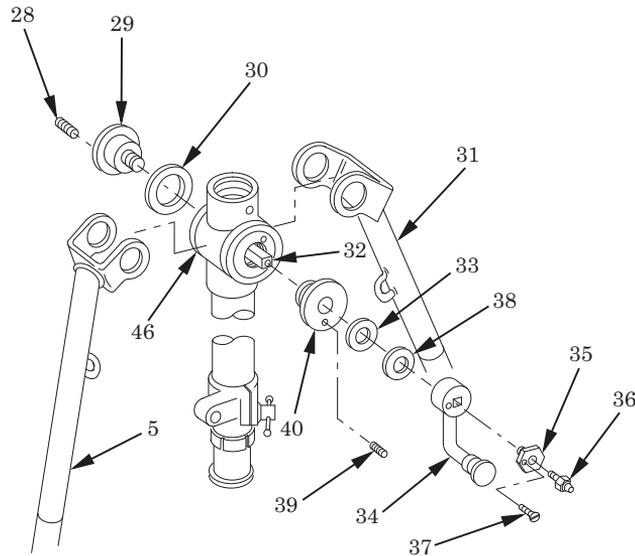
Assembly of Mortar Mount Legs to Elevating Mechanism.
